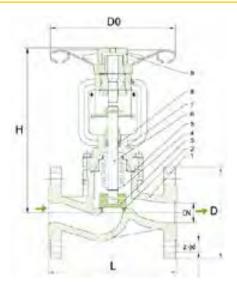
Bellows Sealed Globe Valve (Flanged)
